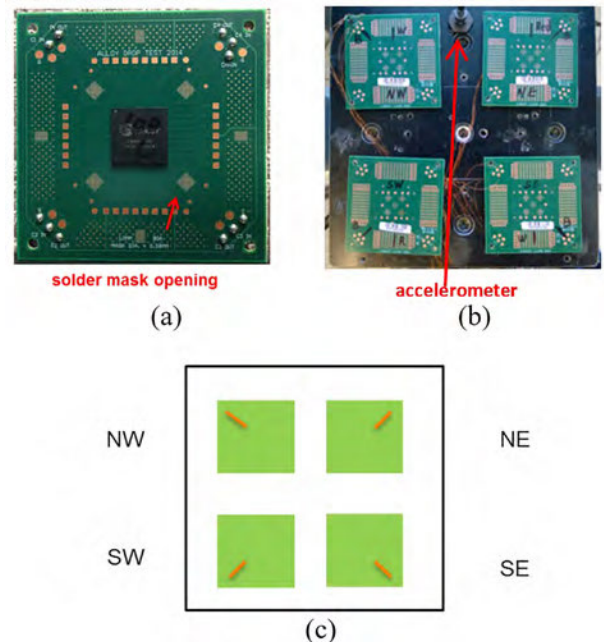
(a) Solder mask opening for attaching strain gage, (b) four boards mounted on table with table accelerometer location indicated and (c) board location identifiers.
